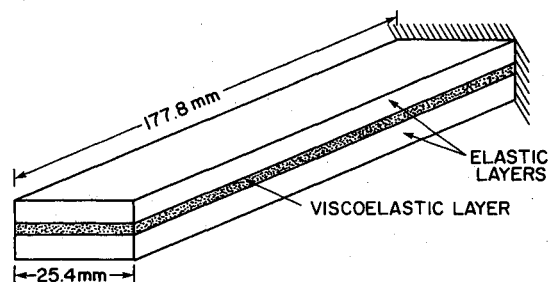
Cantilevered beam with constrained layer damping treatment.
